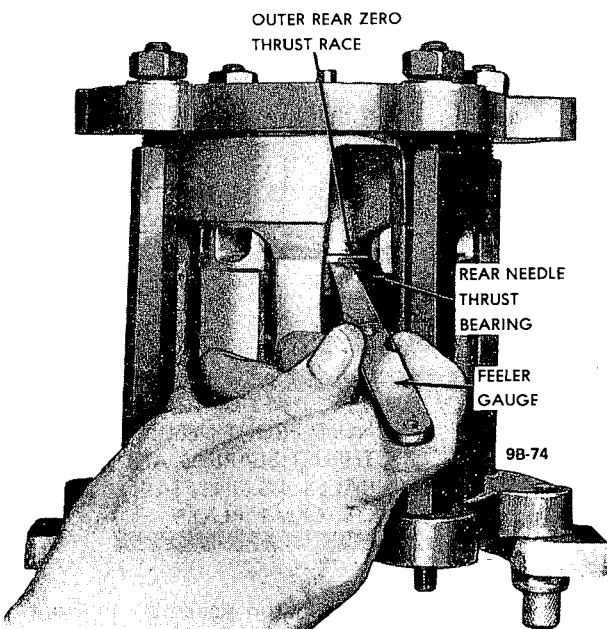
B-101 Gaging Clearance Between Rear Needle Thrust Bearing and Outer Rear Thrust Race - 6 Cylinder Compressor
